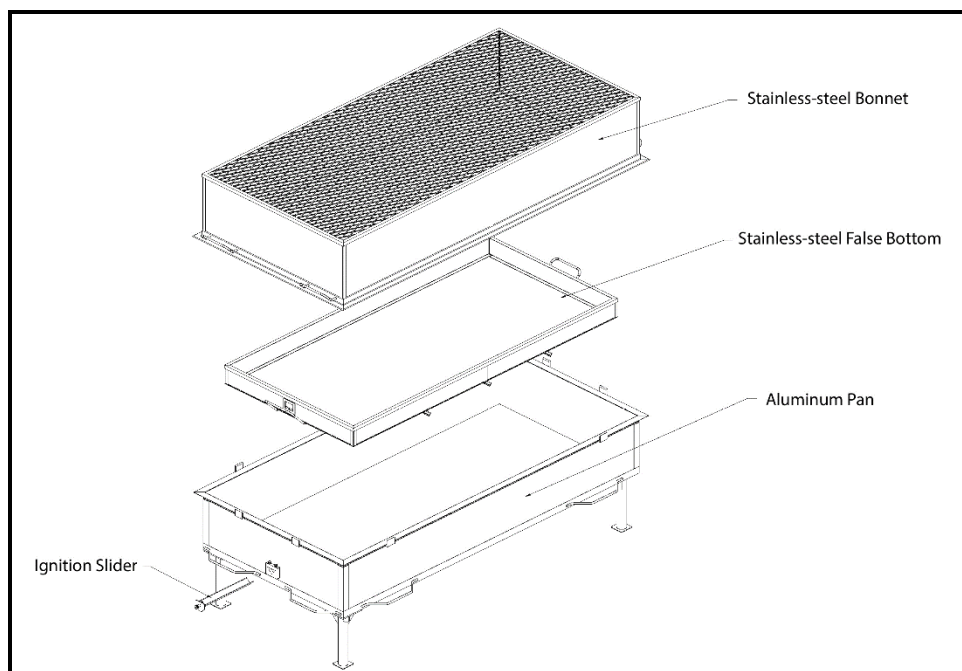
Assembly drawing of the Artillery/Howitzer Training Unit Burn Pan
